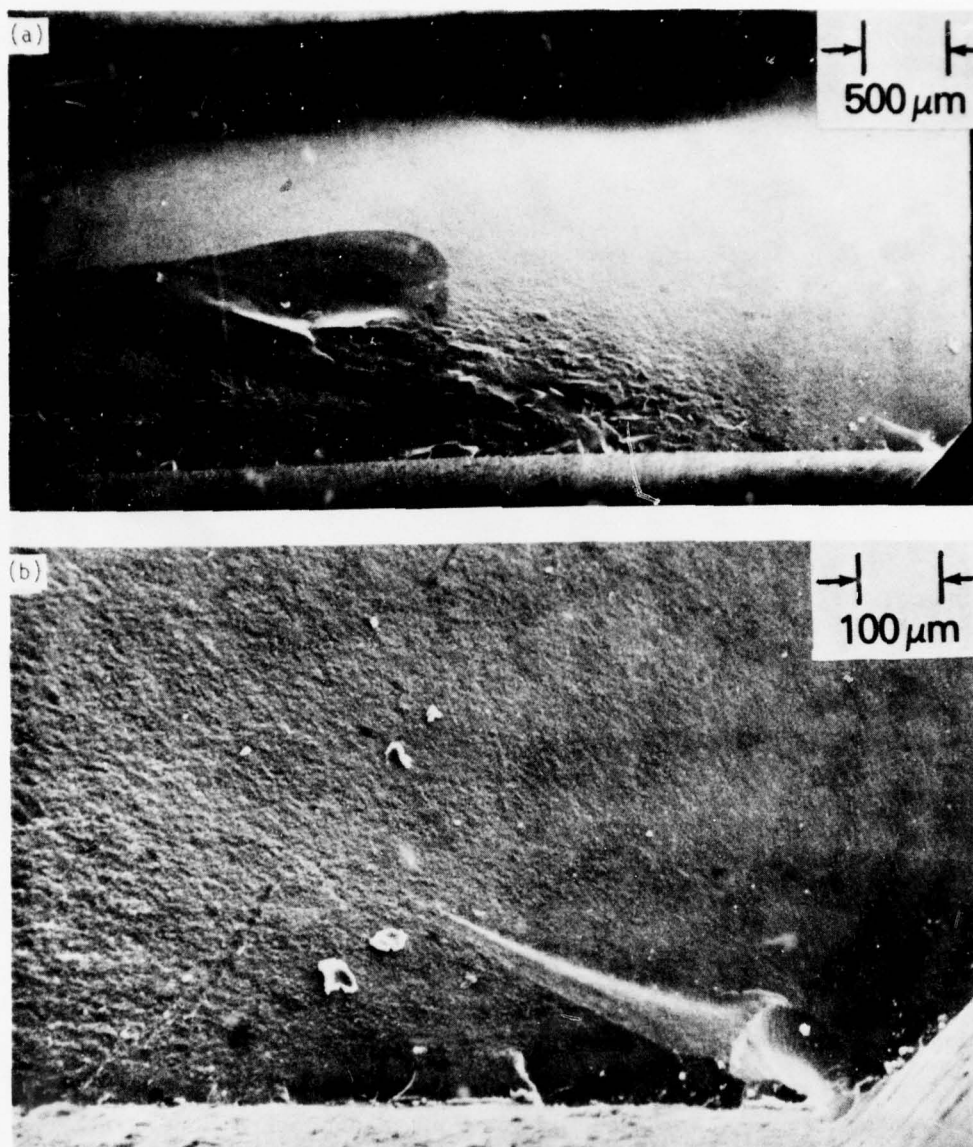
Failure of hot pressed  $\text{MgF}_2$  infrared optical material from a machining flaw located at the corner. The approximate semicircular flaw is located at the intersection of the beveled edge and the tensile surface in the lower right-hand corner of both (a) and (b). The elongated feature extending towards the upper left corner from this flaw is due to the non-planar character of the flaw and its subsequent effect of the fracture first occurring on two planes which subsequently join together.
